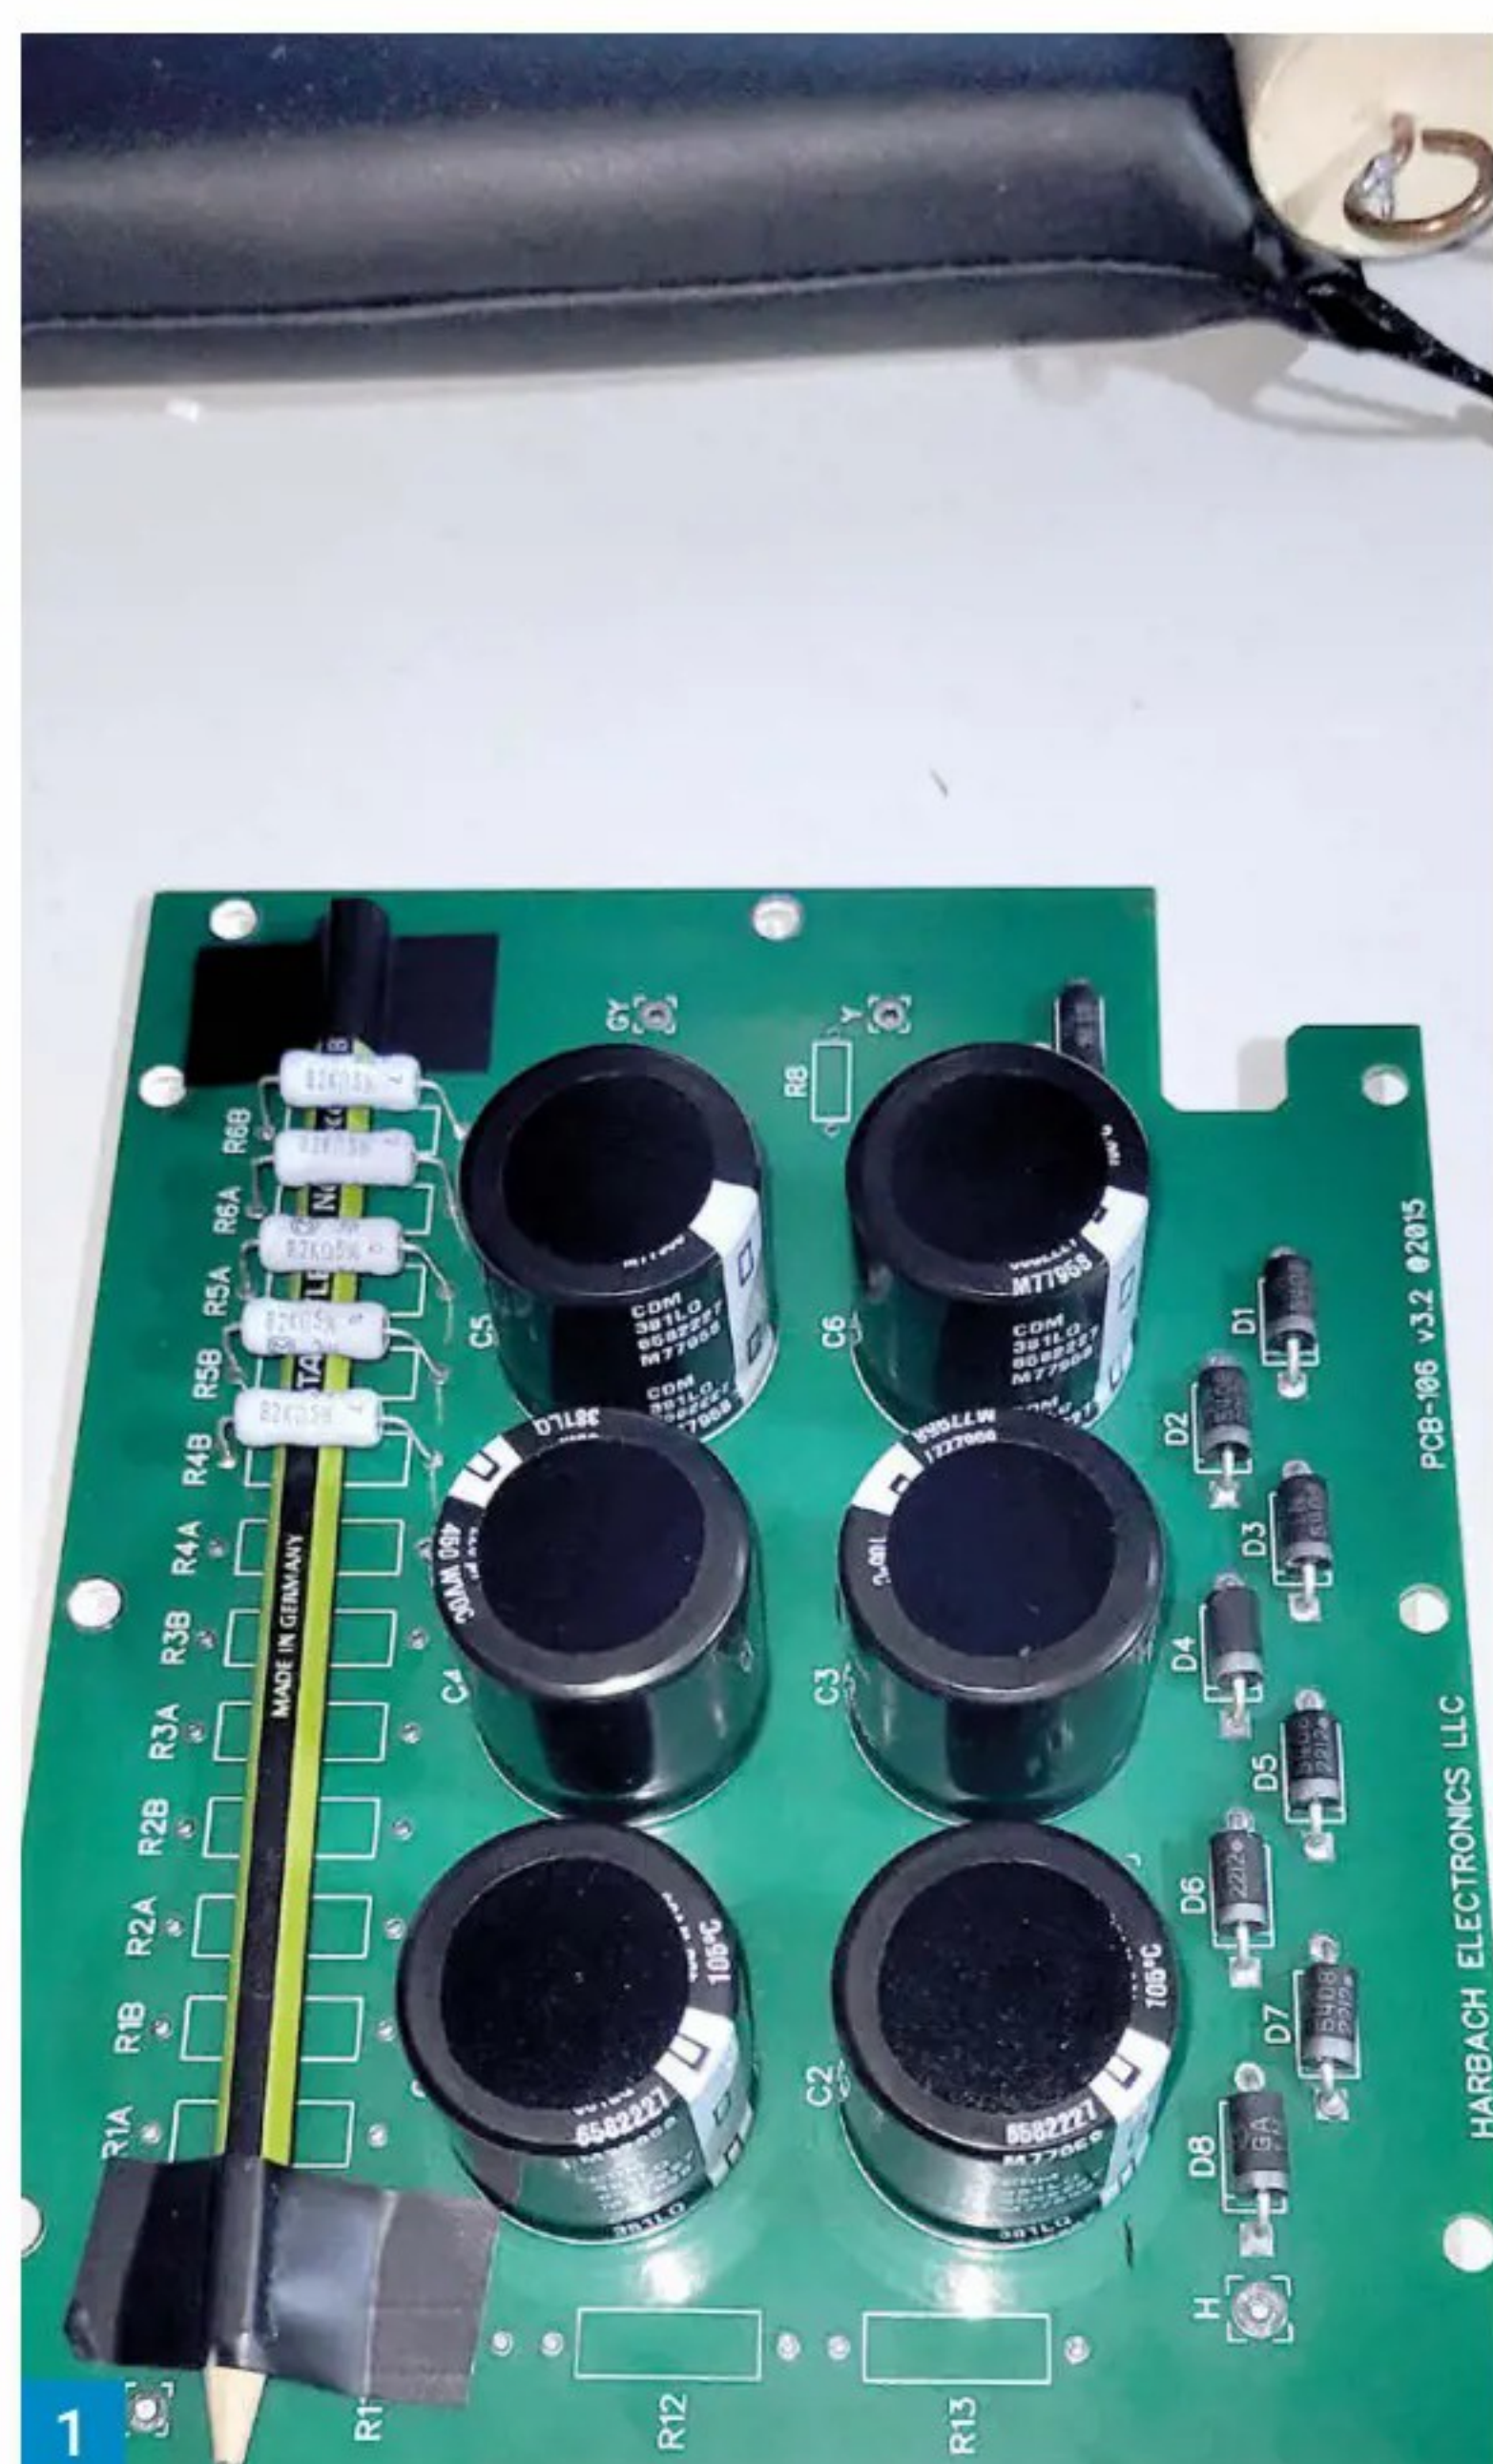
PSU under construction. Photo 2: PSU and soft start ready for install. Photo 3: New power supply installed. Photo 4: Soft start installed.
